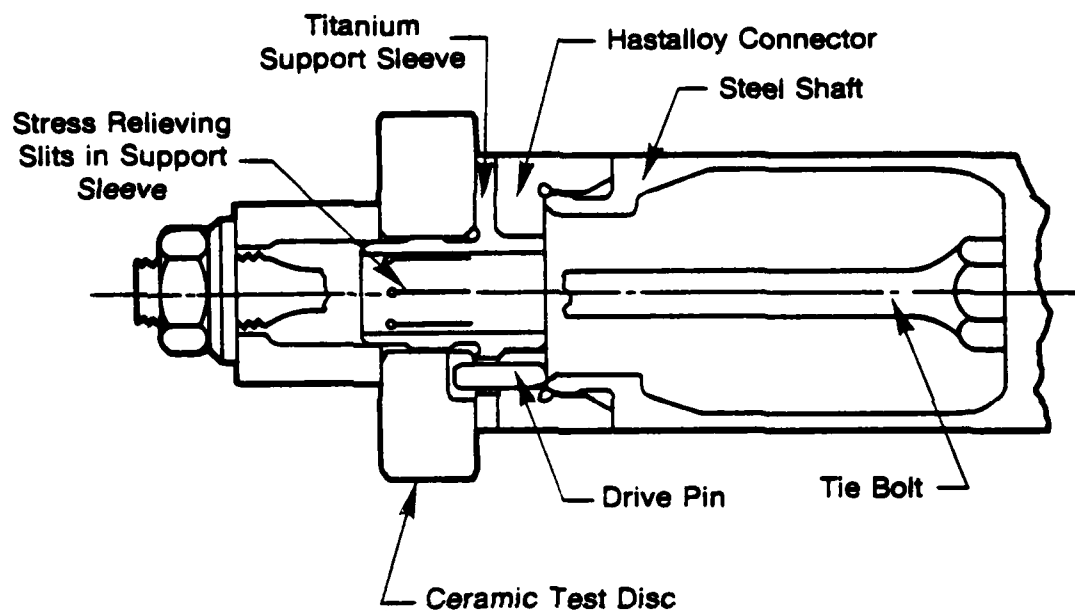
Mounting Method for Ceramic Discs on Metal Shafting
